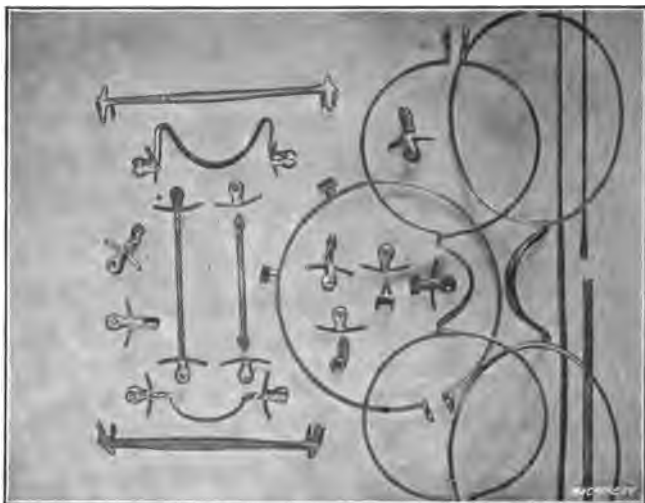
Examples of Eyeglass Parts joined by Electrical Soldering
